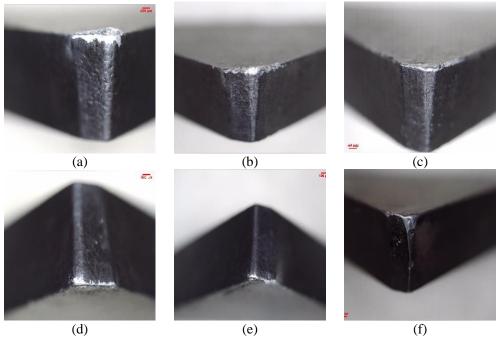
Images of Flank Wear of Tool Bits using Coordinate Measuring Machine.
